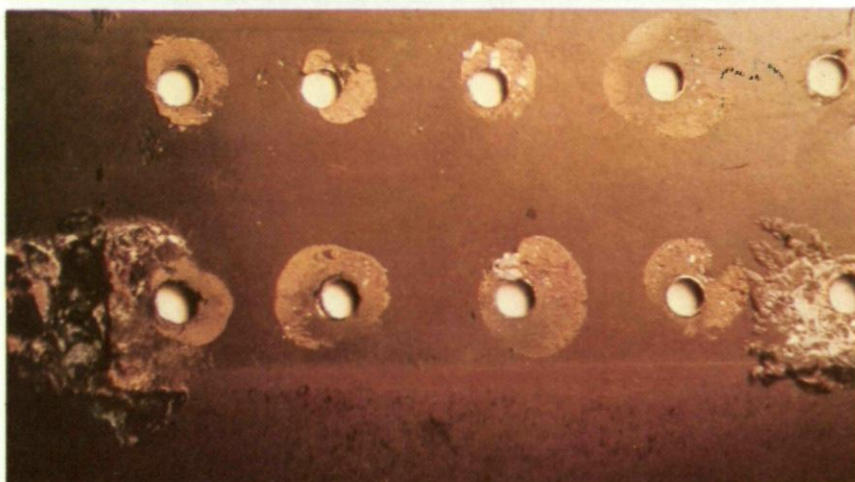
(b) Severe pitting in a cast magnesium alloy stringer end cap
